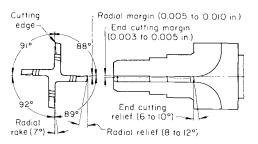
Design of a finishing reamer used for reaming aluminum in automatic bar and chucking machines. Dimensions given in inches
